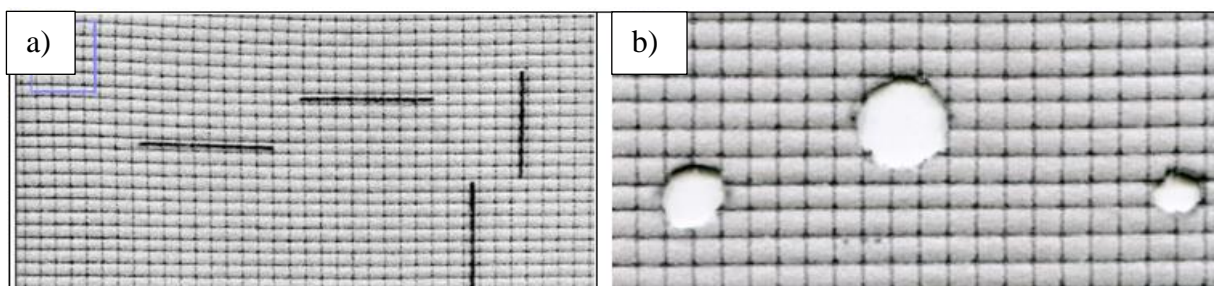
F1 for four-point analysis a) colour defect; b) hole defects
